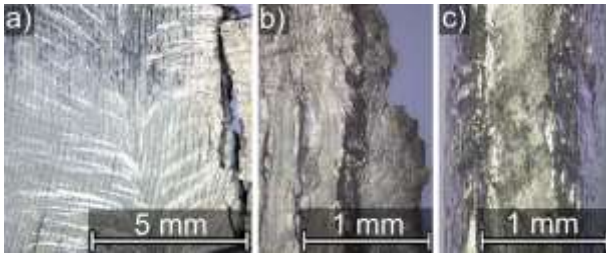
Stereomicroscope images of the fractured tensile specimen (1.4376-1.4376 joint with 1.4430 filler); a),b) deformed weld metal surface and c) the fracture surface
